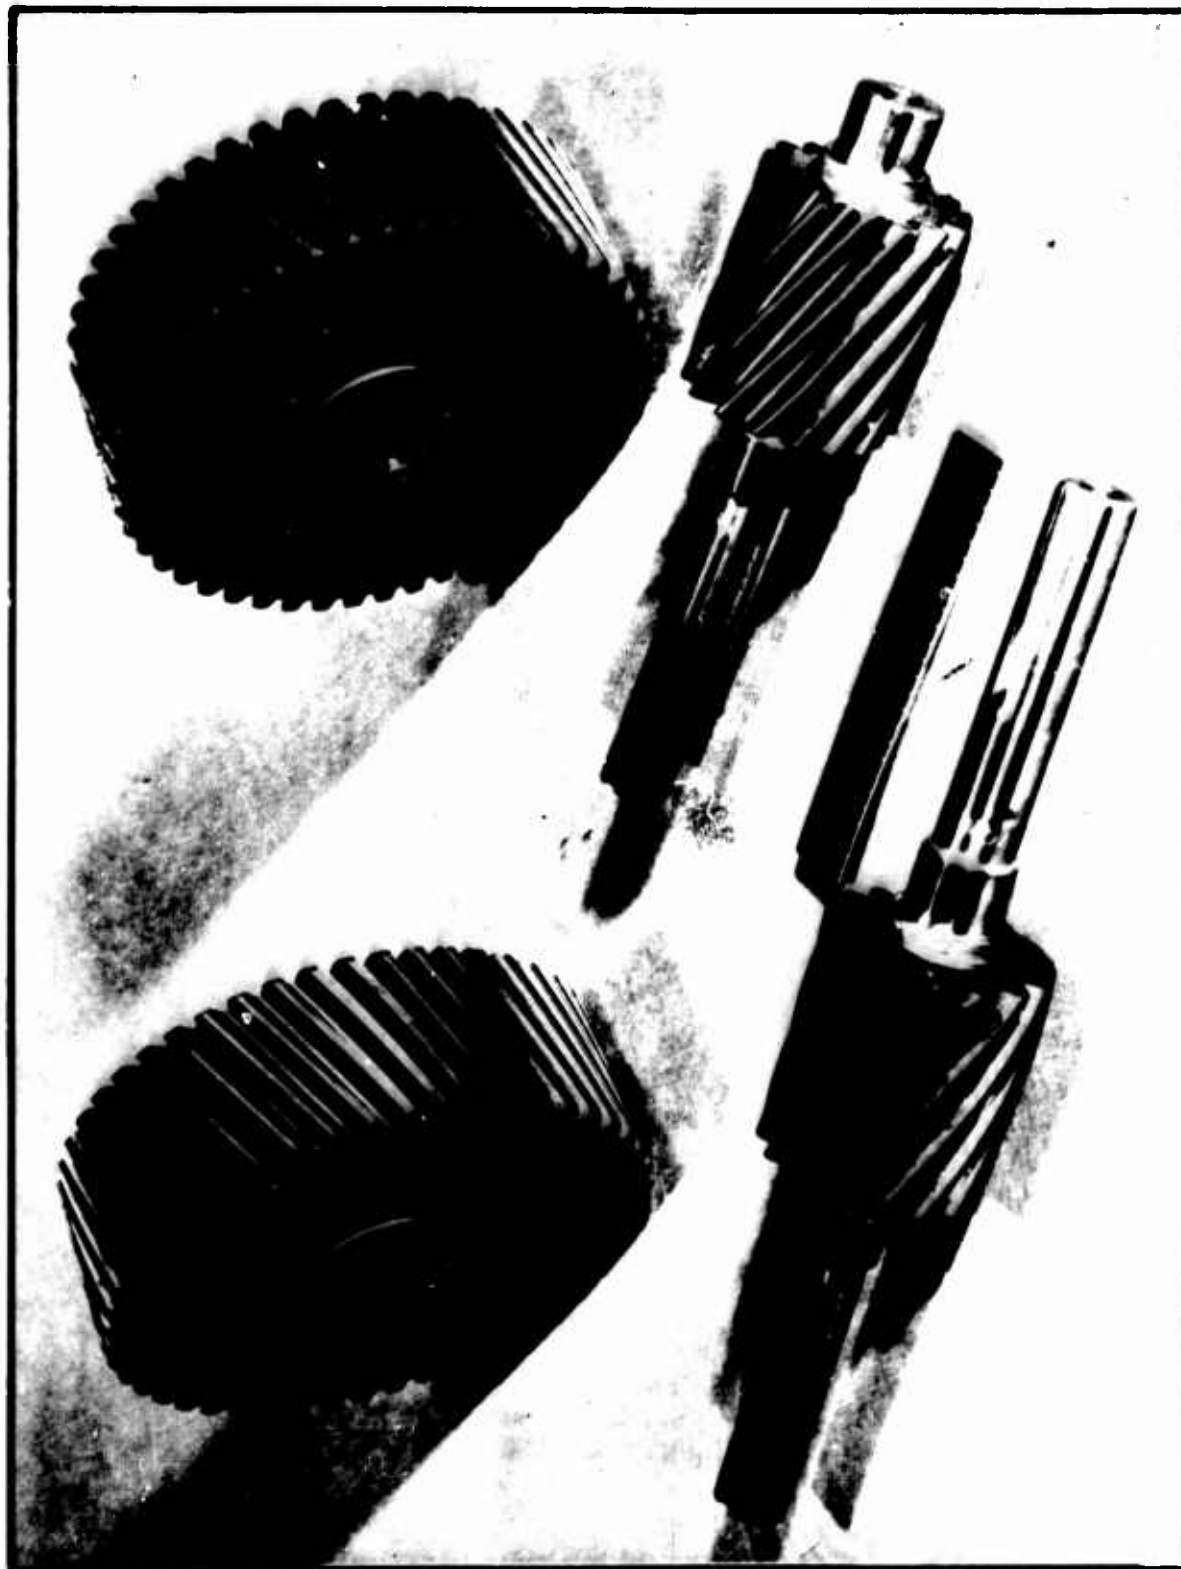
Gear Teeth - Nos. 1 and 2 - the light areas on the tooth surfaces adjacent to the gear faces indicate depletion of lubricant (lub. Mol. + Epoxy Binder)
